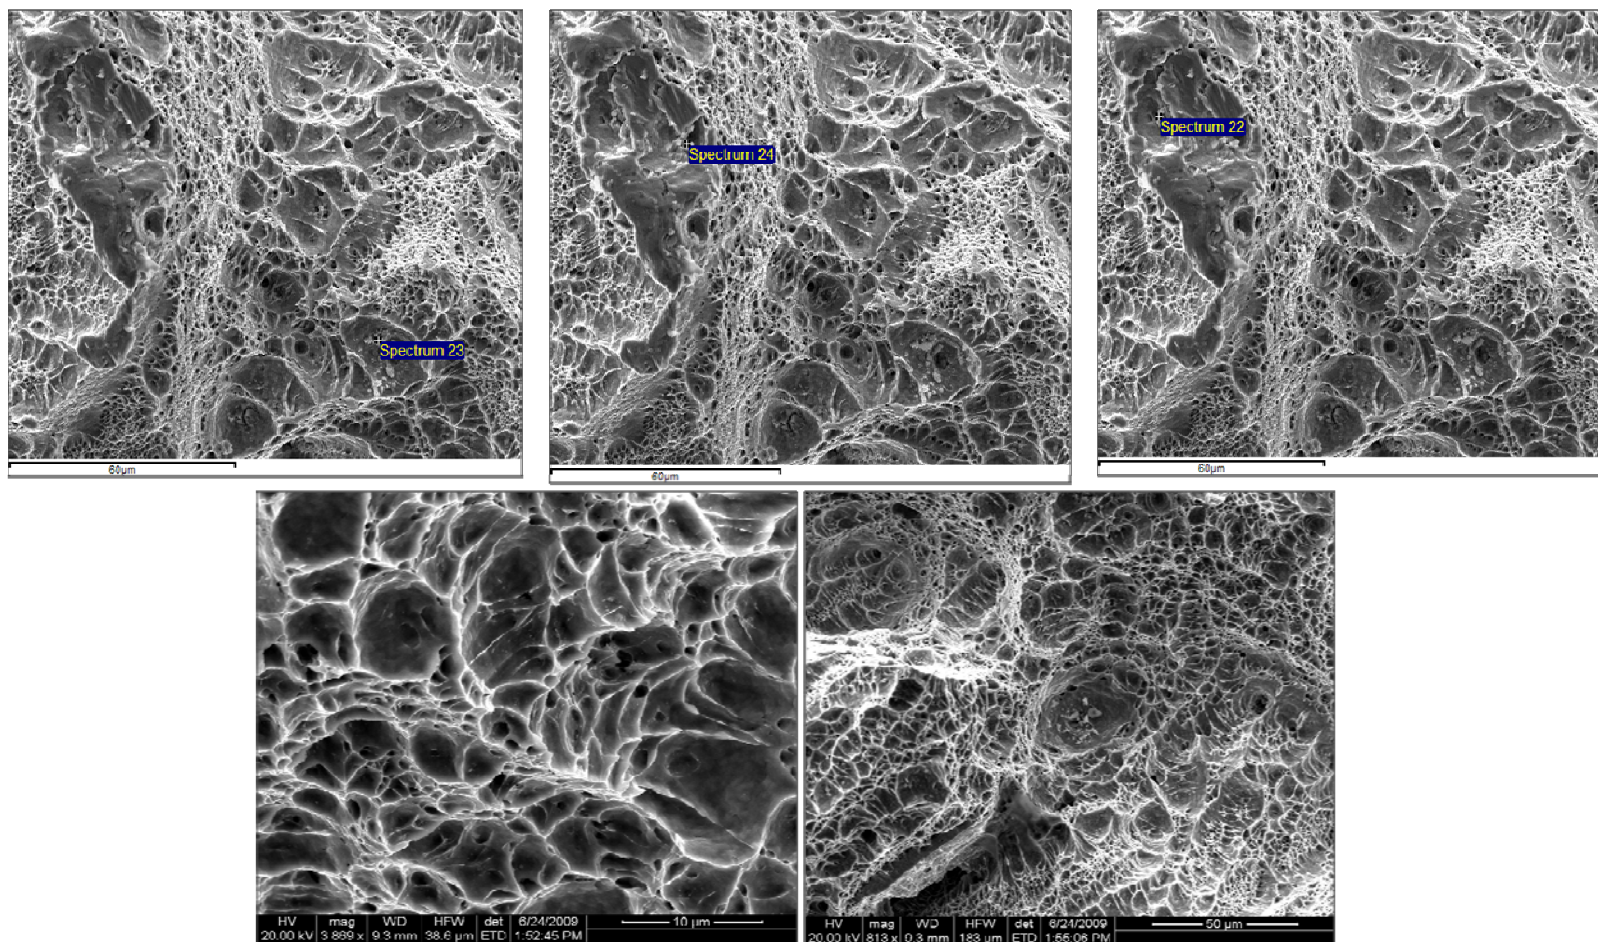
More fracture surfaces taken from the broken sharp notched bar sample 3B5-R.
